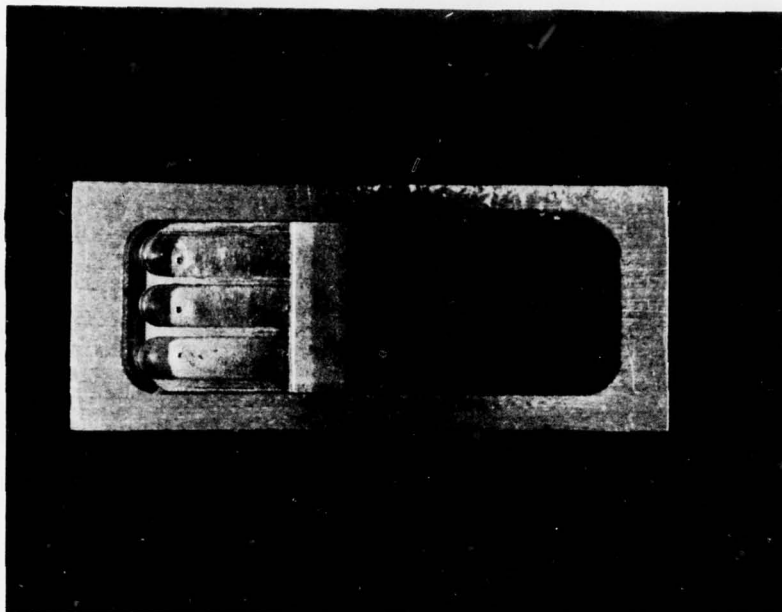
Cut-Away View of Transpiration-Cooled Shroud Used in Contract F33615-76-C-2026
